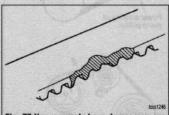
You may only have damage on one side of the belt; if so, the guide could be the culprit
